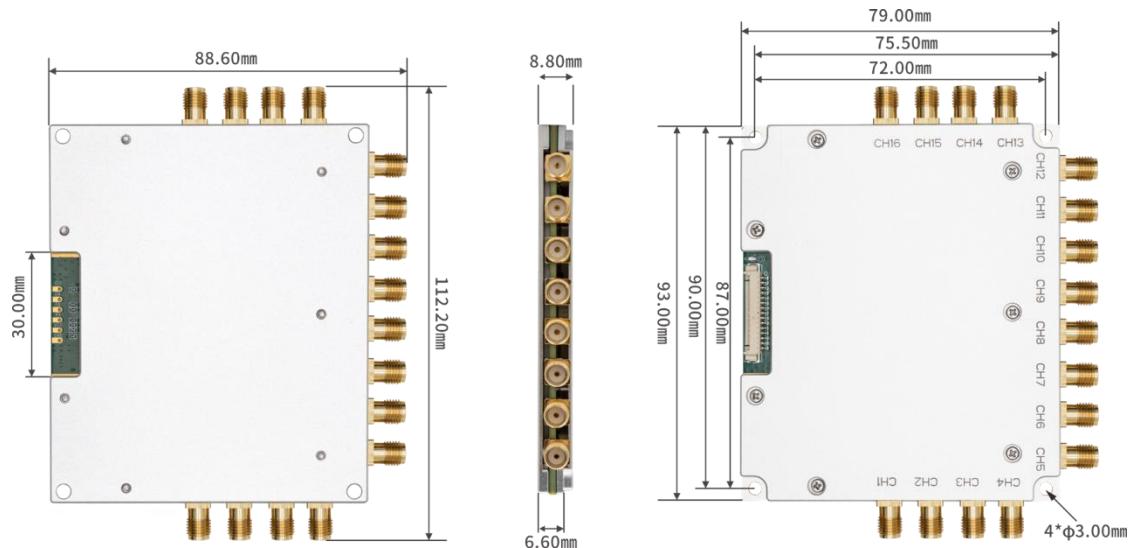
d Multi-Channel Module (CM710-16) Appearance and Dimension
